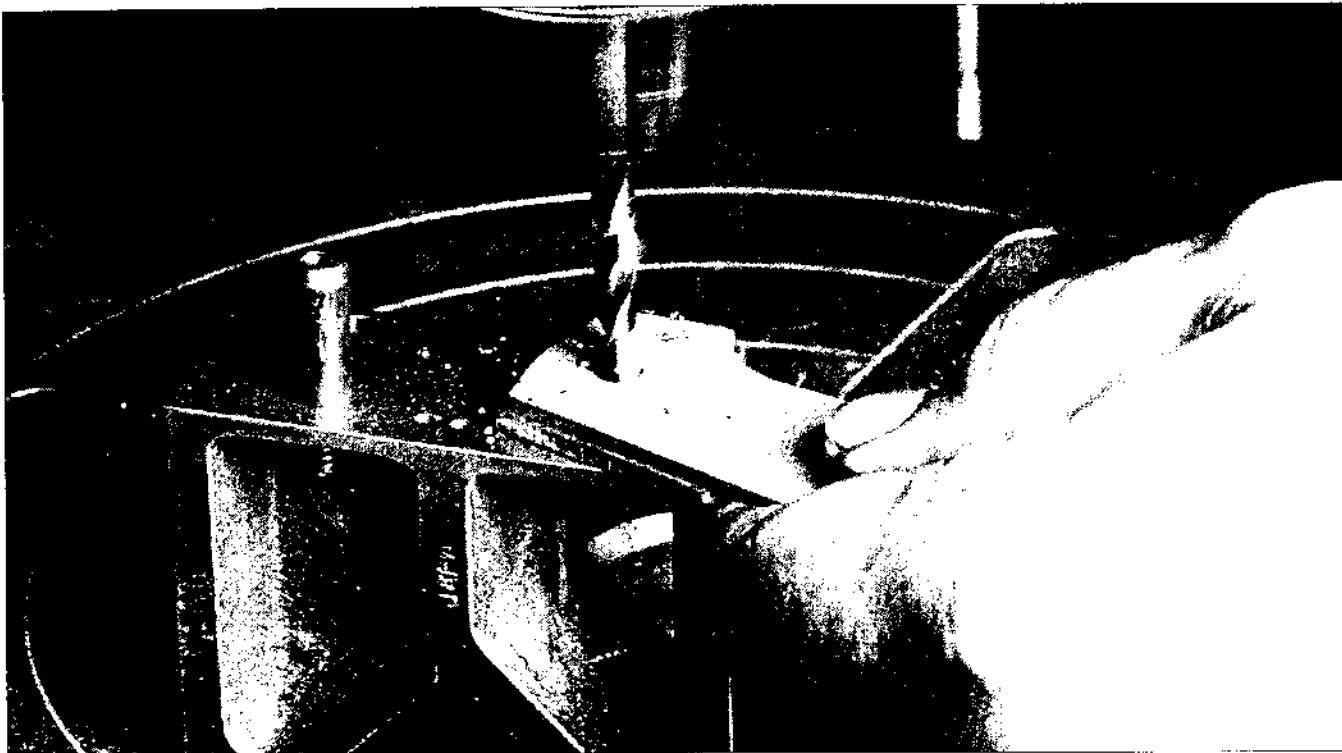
I use a ready-made bolster as a drill guide to drill the screw holes into the liner.
